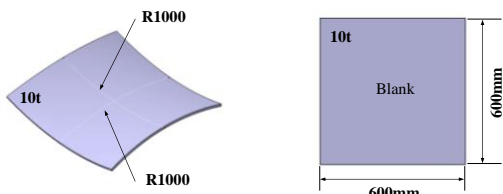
Design Configuration of saddle type plate model and blank size[unit : mm]
